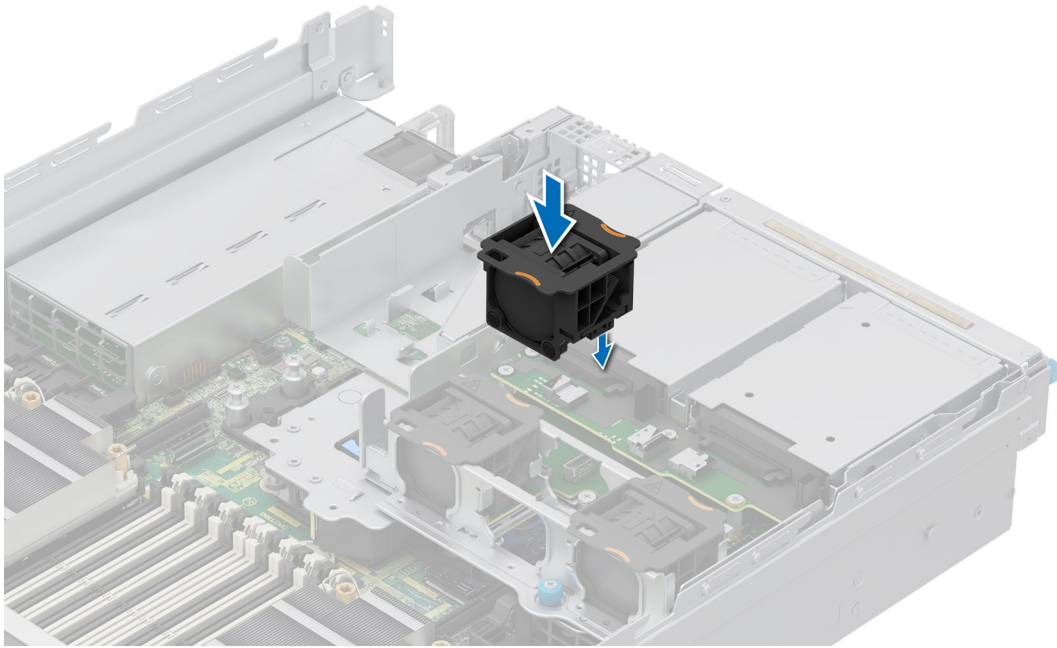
Installing a 4 x 2.5-inch rear drive module cooling fan
